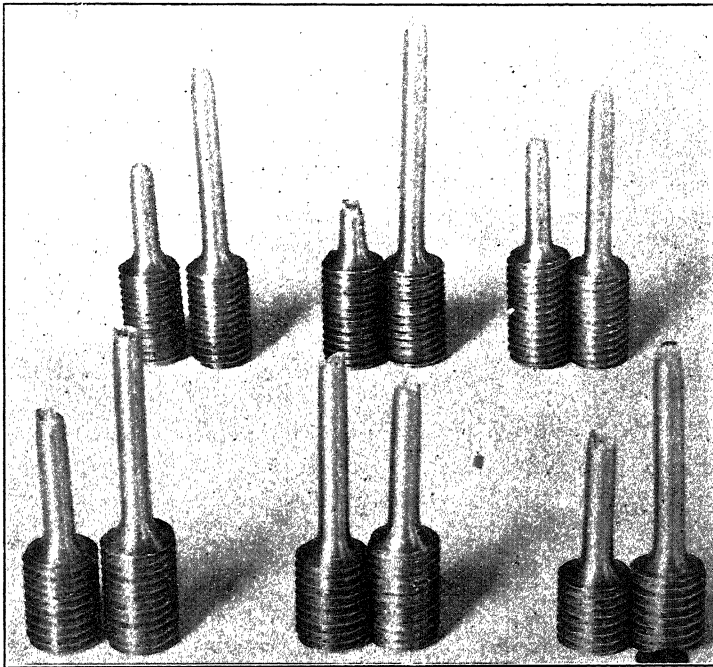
FRACTURES OF SECOND HEAT-TREATED SPECIMENS SUBMITTED TO CHARPY TENSILE TEST.
